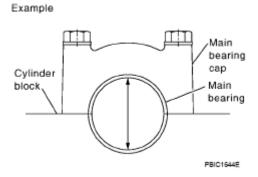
Checking Main Bearing Oil Clearance Courtesy of NISSAN MOTOR CO., U.S.A.
